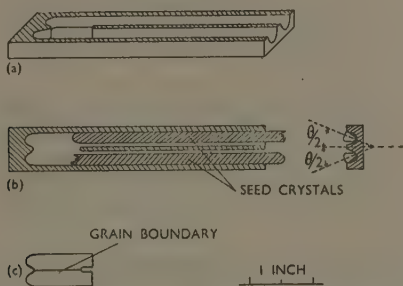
Illustrating Preparation of Bicrystal Specimens. (a) Mould; (b) setting of seed crystals in the mould; (c) specimen.
